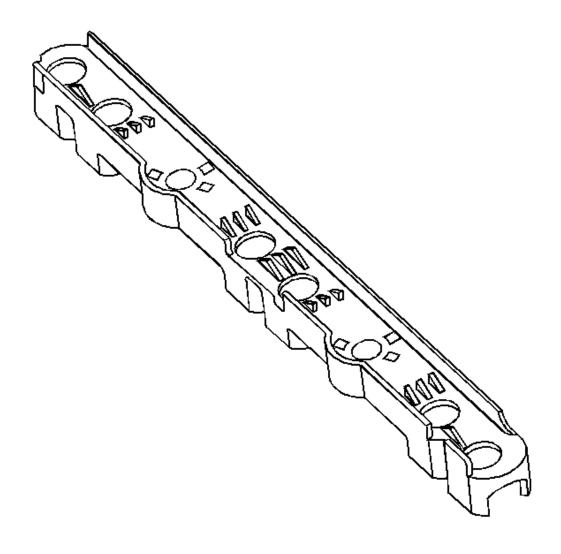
Inspecting Valve Lifter Guides Courtesy of GENERAL MOTORS CORP.
